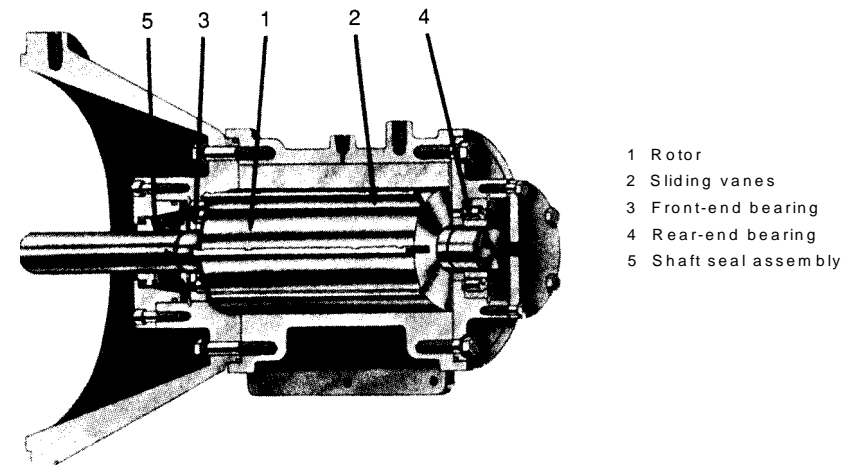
Sliding-vane compressor. Courtesy Dresser-Rand
